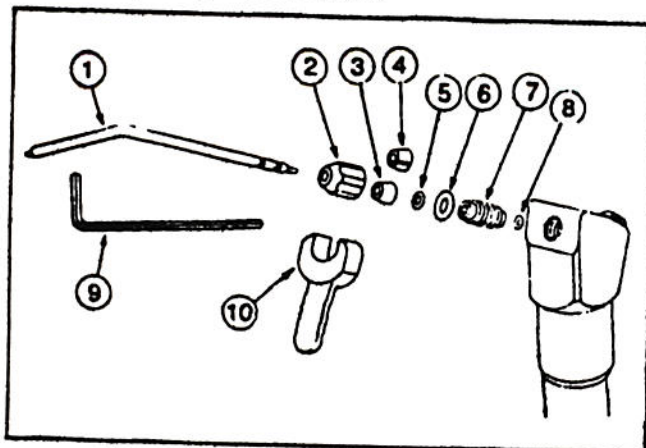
An exploded view of the kit provided by American Dental Equipment Co. Installation requires no special tools other than those provided in the kit.
